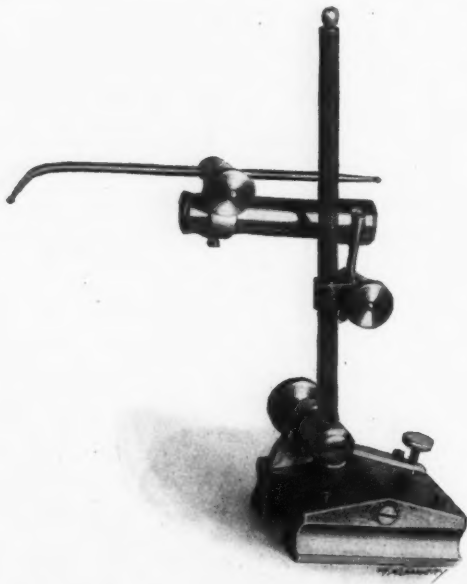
Xander Electric Test Indicator mounted on Surface Gage
